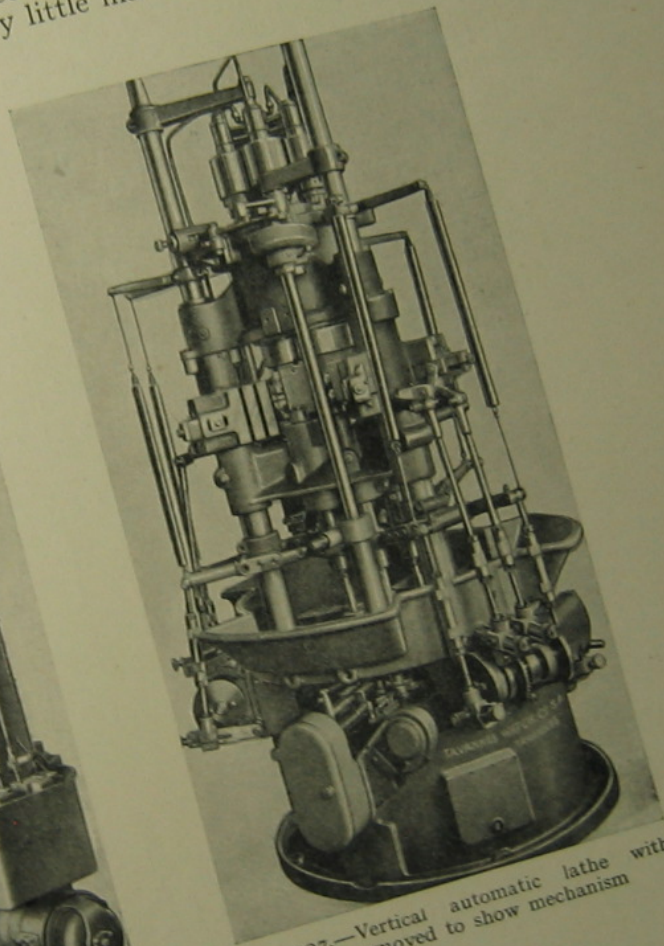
Vertical automatic lathe with casing removed to show mechanism
